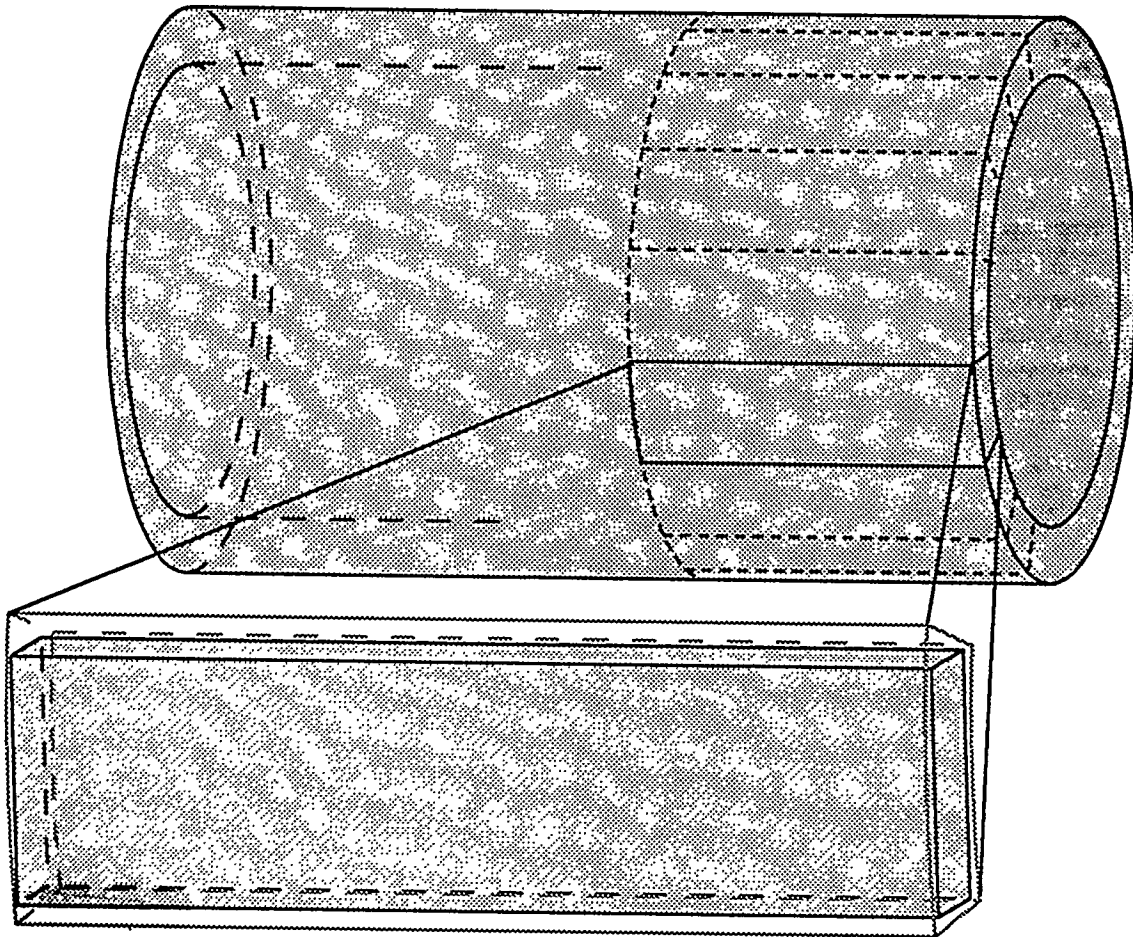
Segment of Si-SiC tube showing sectioning plan for removing SE(B) specimen blanks.
